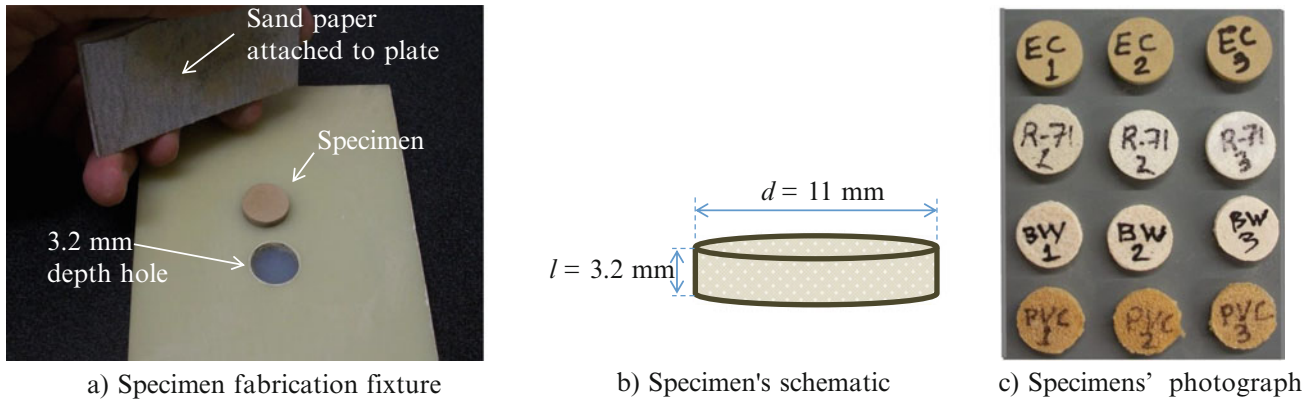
Fabrication process, schematic and photograph of specimens
